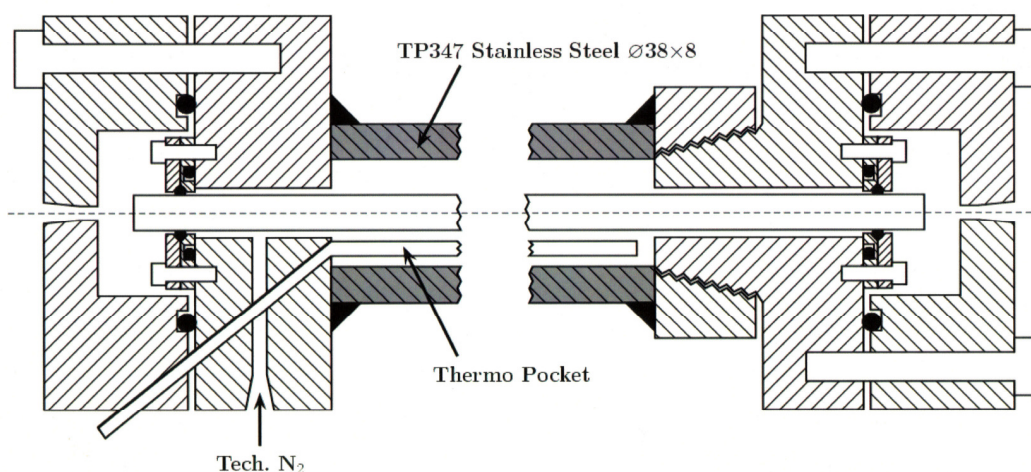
Diagram illustrating the principles of the steel flanges, the sealing of the reactor and the pressure control system. White hatched parts represent AISI 316 stainless steel flanges. Grey hatched parts indicate the TP 347 stainless steel pressure shell. Black circles indicate Viton O-rings. Black triangles represent welded connections. Each flange is fixed by four bolts, with the position of the bolts illustrated by white silhouettes. The quartz reactor is also represented by a white silhouette.
